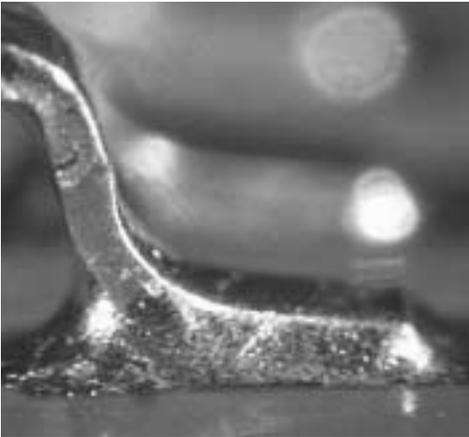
NiPdAu Finish NS, SnPbAg Solder, OSP PWB Finish
